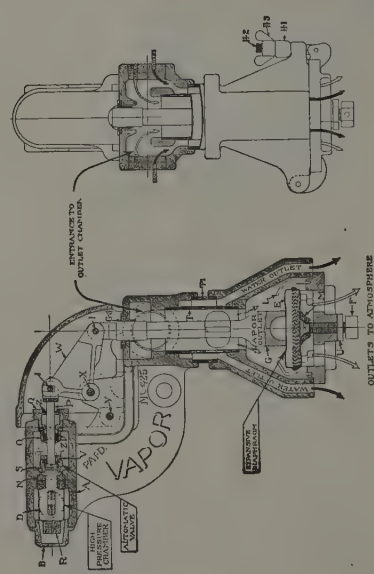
Cross Section of Short Type Vapor Regulator.
